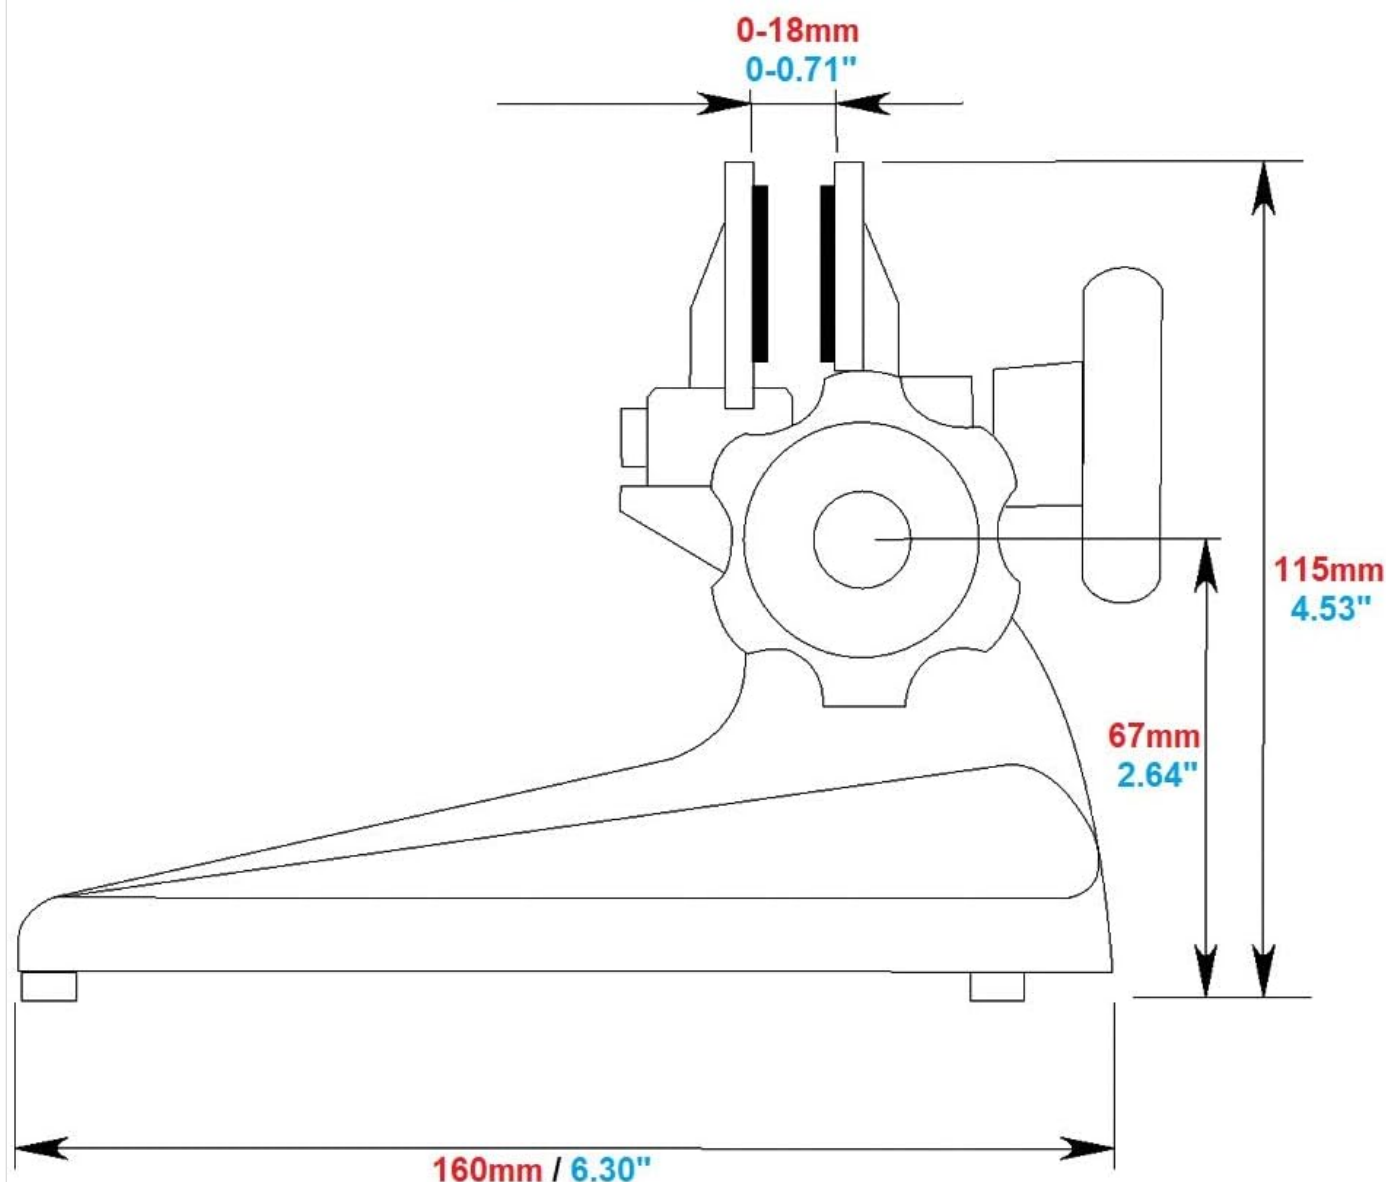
Dimensional drawing of the Dasqua Micrometer Stand, showing key measurements.
